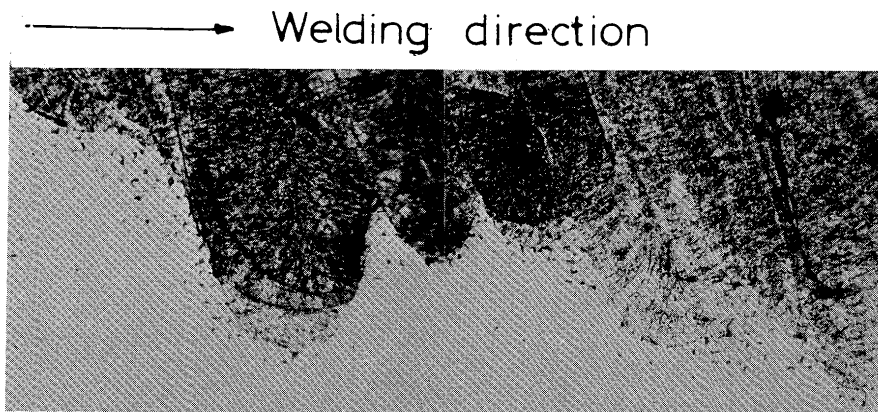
Examples of spiking at longitudinal weld bead section.
